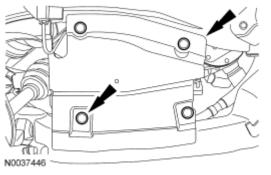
Locating Splash Shield Pin-Type Retainers Courtesy of FORD MOTOR CO.
